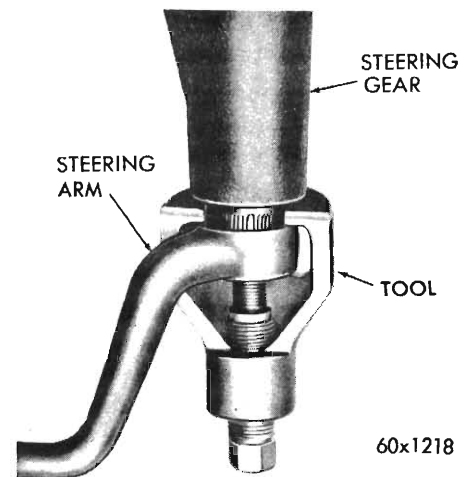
Removing steering gear arm (Tool E2C5A)
